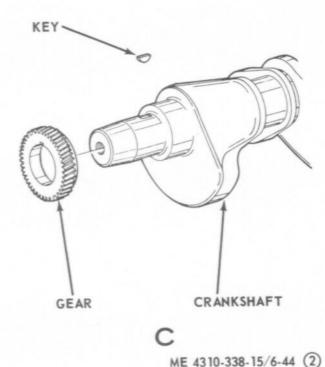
Main bearings and crankshaft, removal and installation (sheet 2 of 2).
